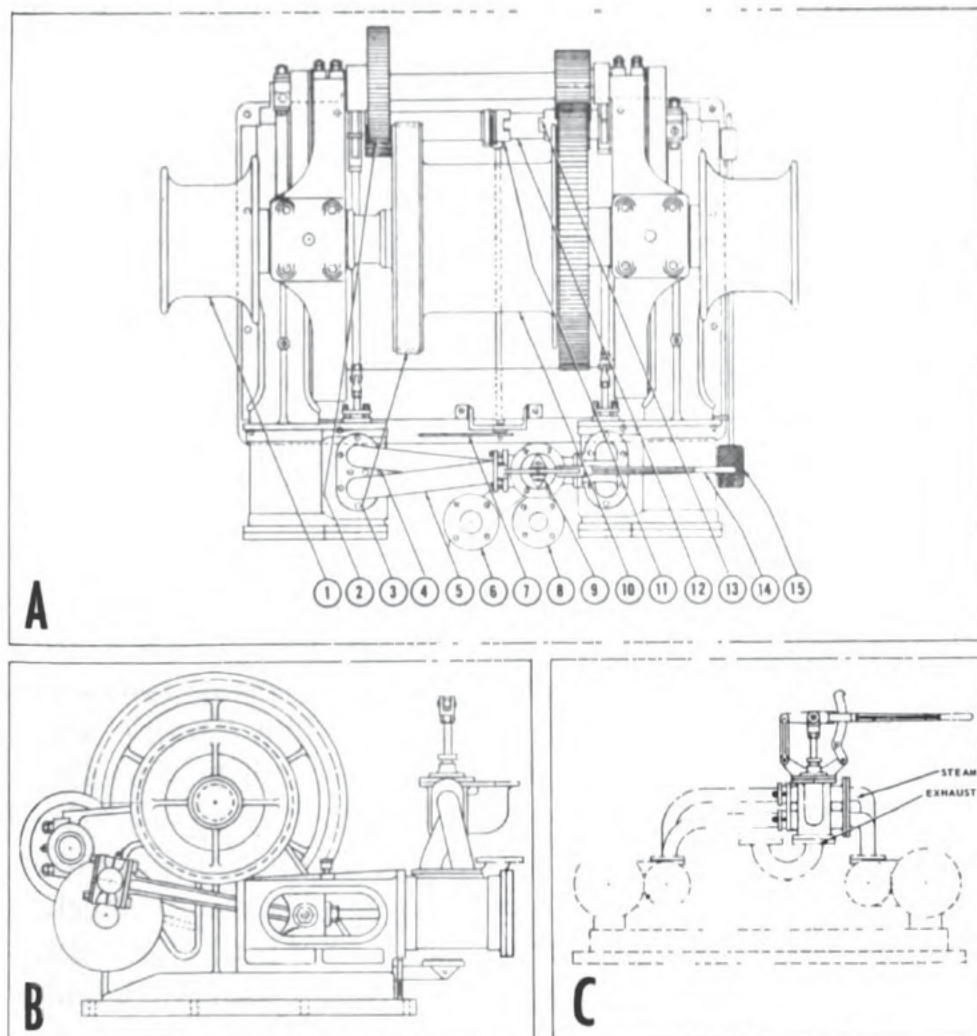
Steam-operated winch: (A) plan view; (B) side view; (C) reversing throttle valve.
